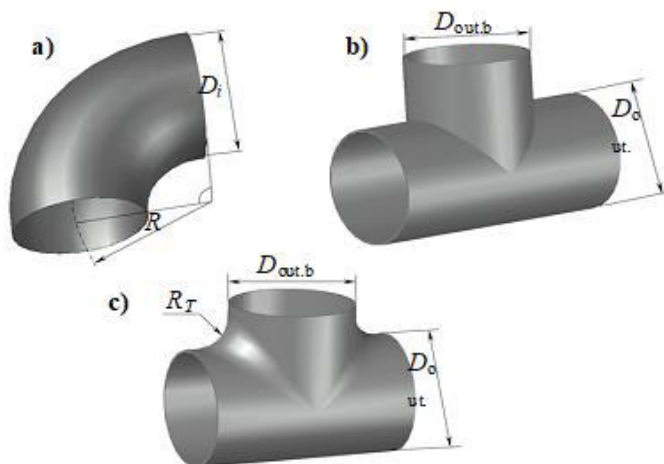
Geometric models: *a* – bend; *b* – welded tee; *c* – stamped tee
